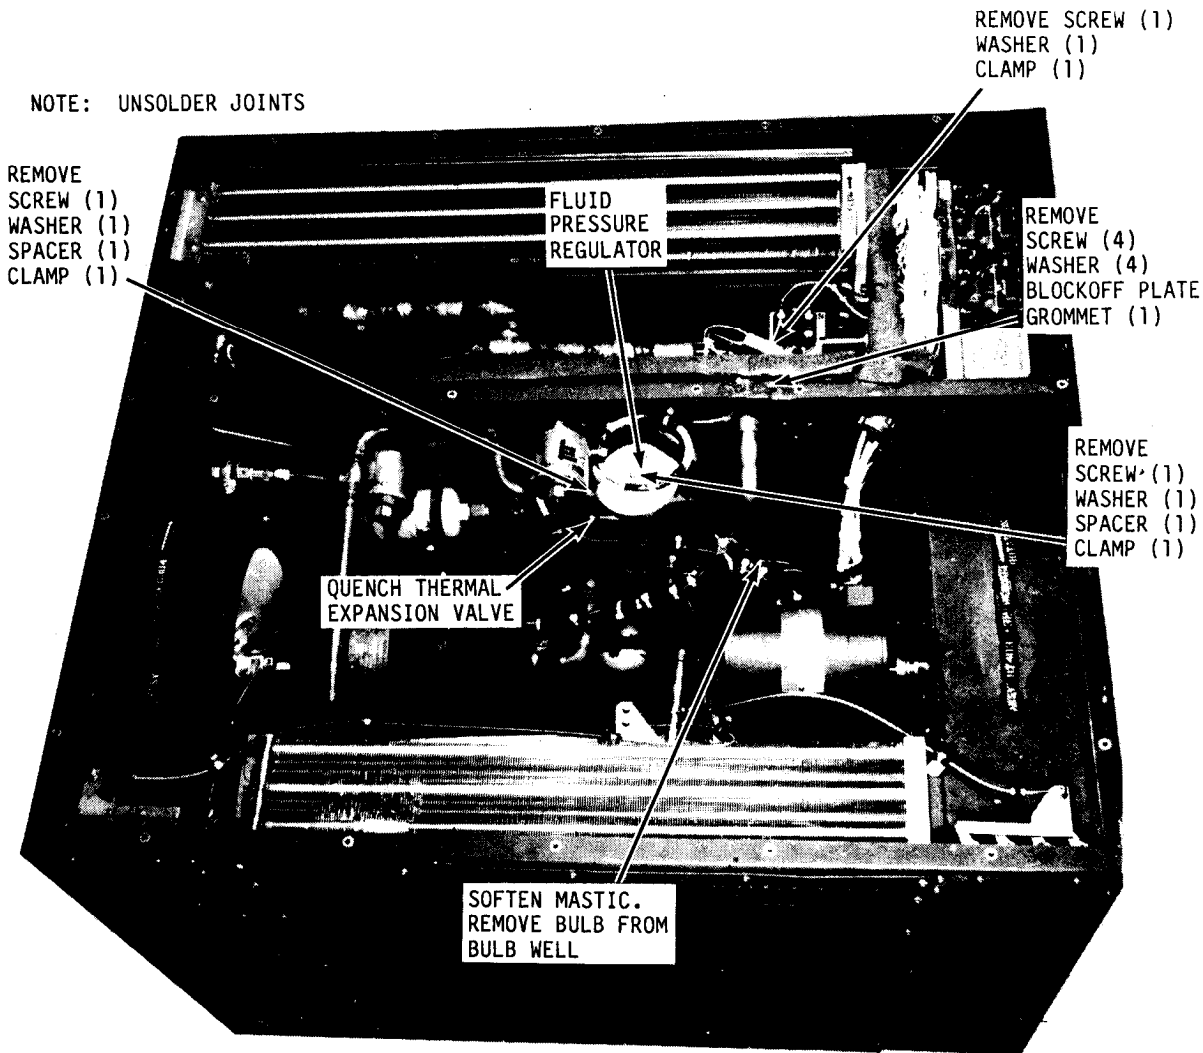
Quench thermal expansion valve and fluid pressure regulator, removal and installation
